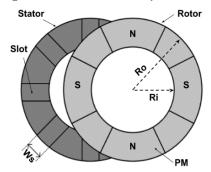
Main Dimensions of Axial Flux PMBLDC Motor R-III
